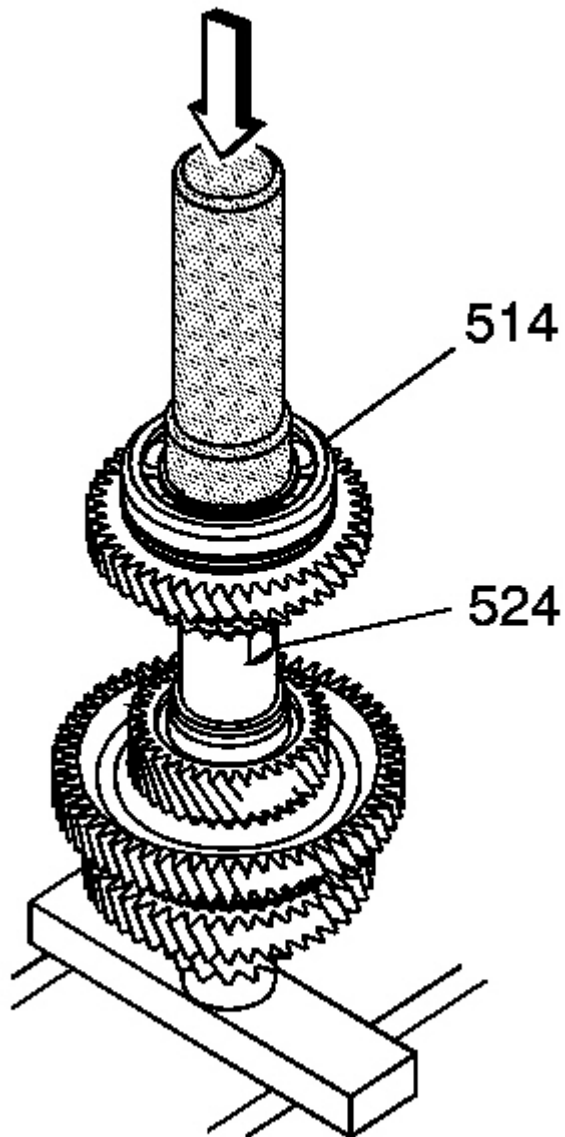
Installing Rear Bearing & Output Shaft Using DT 46509 & Hydraulic Press
